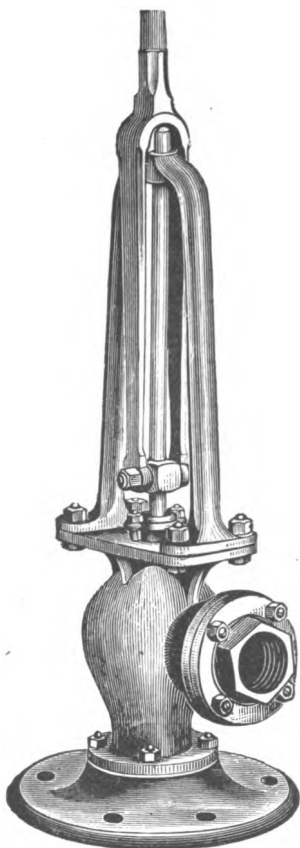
shows a Working Head, provided with connecting rod, piston rod, stuffing box, guide, etc., to be used with the Cornish Cylinders on opposite page, as also the Flanged Cylinder shown below. This head is to be connected to the Cylinders by pipes and rods of sufficient length to reach to the bottom of the well or mine. We can furnish everything complete for wells of any depth.
